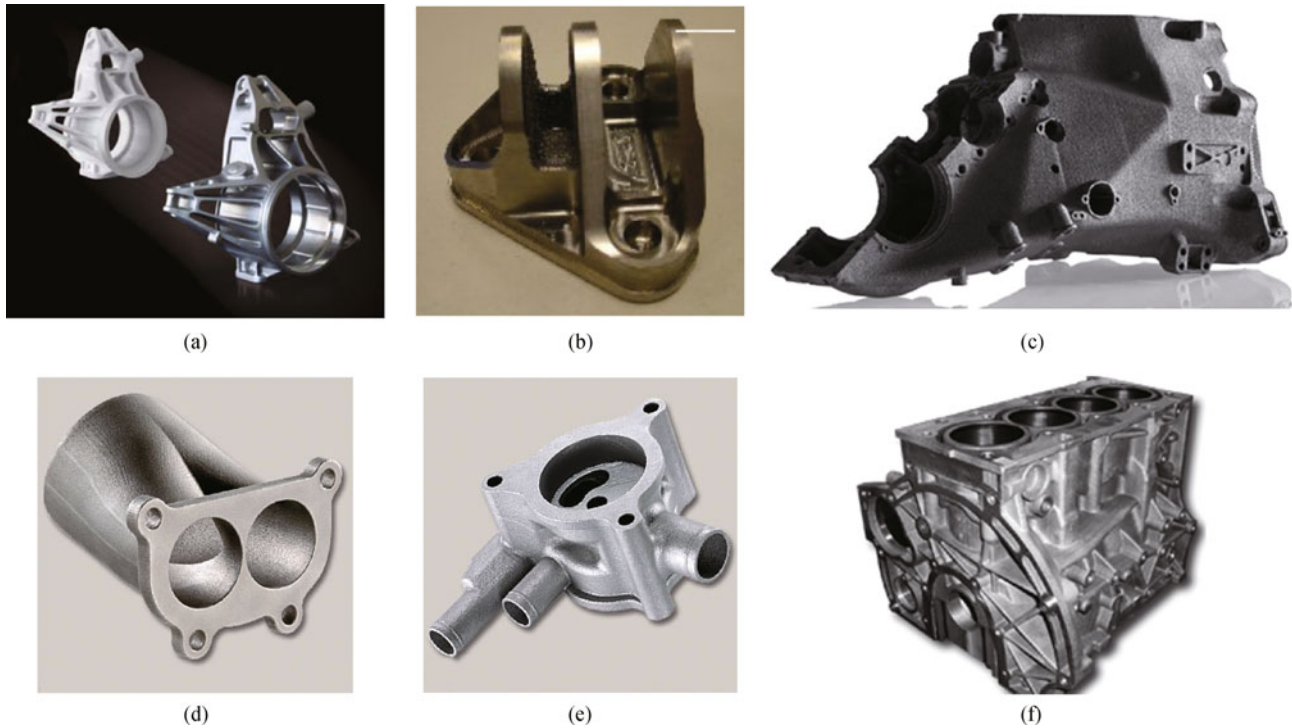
(a) F1 upright (right) cast via rapid casting process using polystyrene patterns produced by SLS (left) (Source: CRP Technology [151]); (b) suspension mounting bracket for Red Bull Racing produced by LENS (Source: Optomec [133]); (c) race car gear box produced by EBM (Source: Arcam [124]); (d) exhaust manifold produced by SLM (Source: Concept Laser [134]); (e) oil pump housing produced by SLM (Source: Concept Laser [134]); (f) engine block cast using the mold and cores fabricated by 3DP (Source: Prometal [136])
